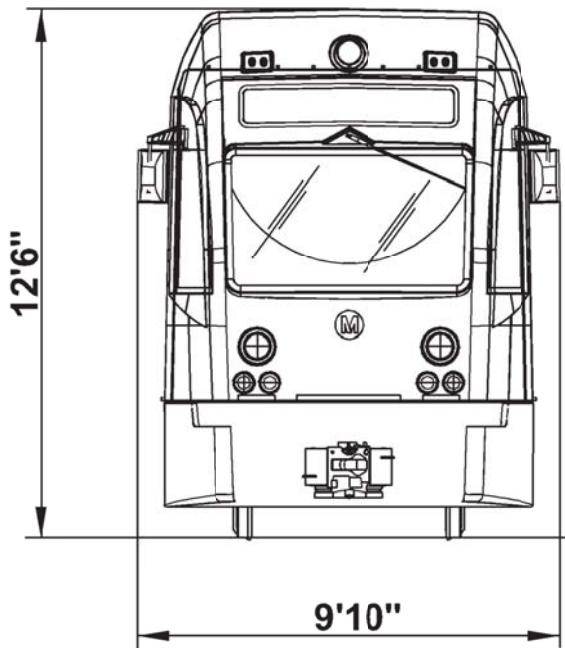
I-02.3 Car Body Overall Dimensions - Front
